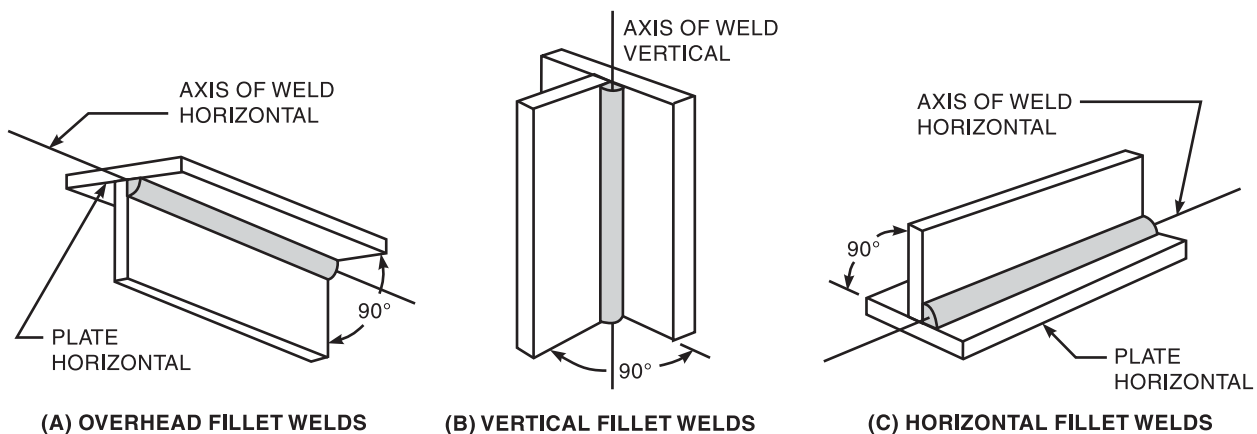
Welding Positions for Fillet Weld Test Assemblies
